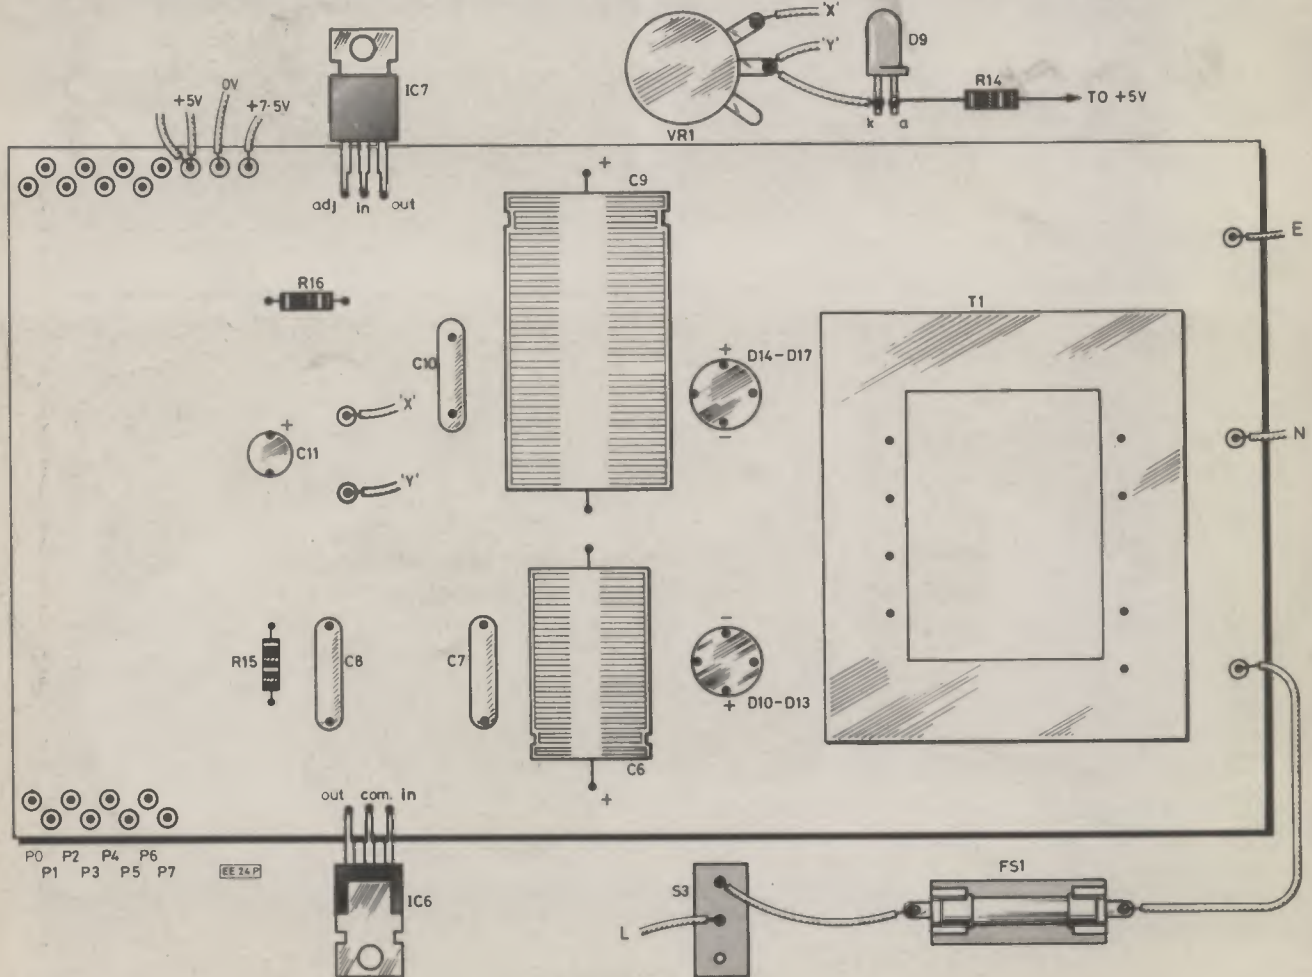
Layout of components on the fopside of the power supply board and interwiring to case mounted components.
